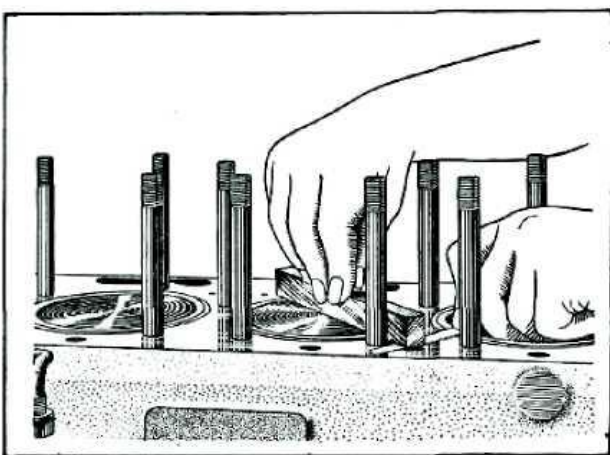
Checking Piston Crown Clearance on an L4 Engine.
